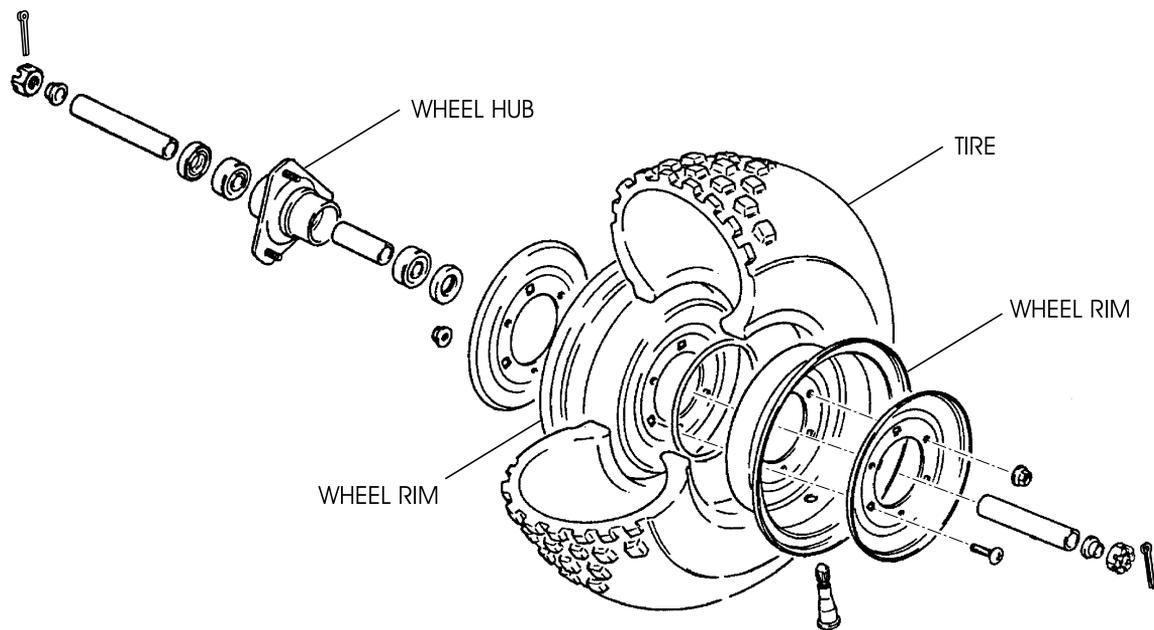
A typical ATV split rim is shown here. (Courtesy of American Suzuki Motor Corporation)
